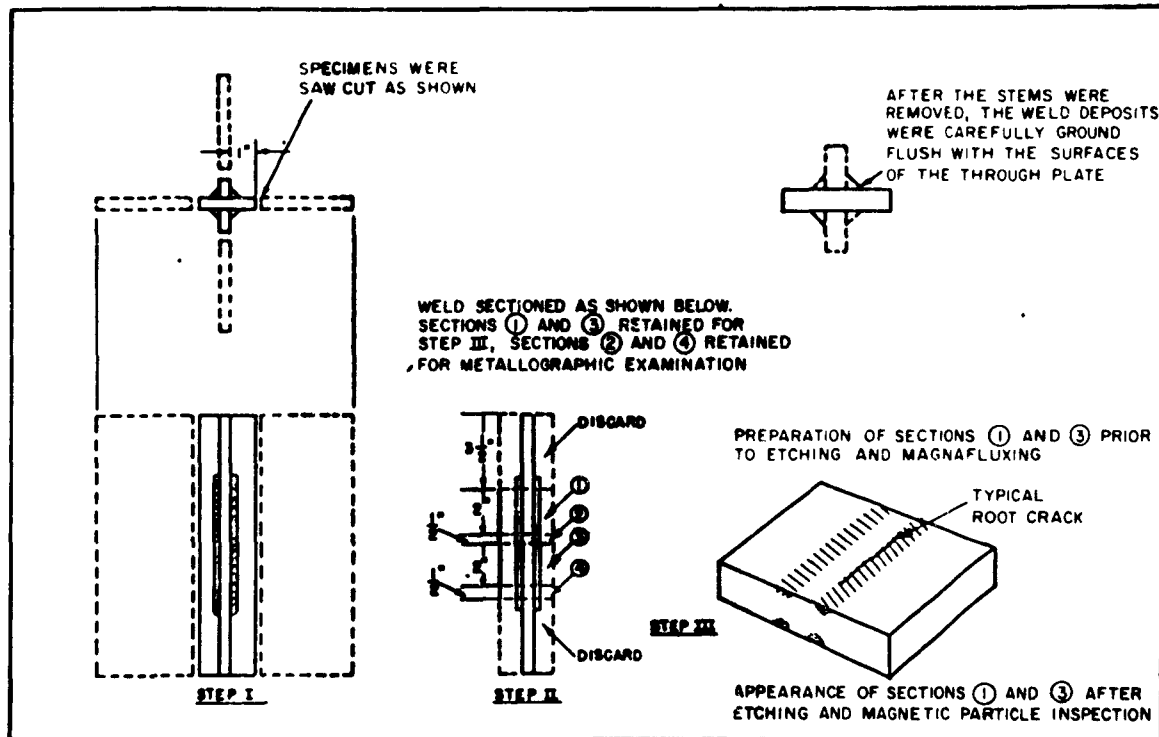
Details of the Sectioning and Inspection Procedure for Single-Pass-Welded Cruciform-Shaped Specimens
